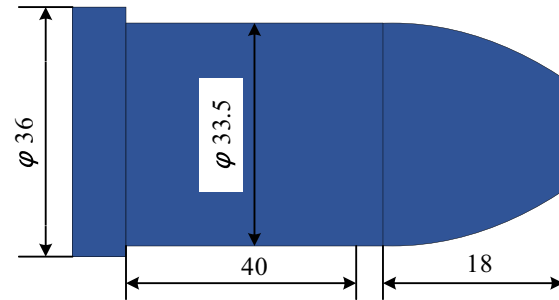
Size of metal round plugs used to maintain tube end shape (mm)
